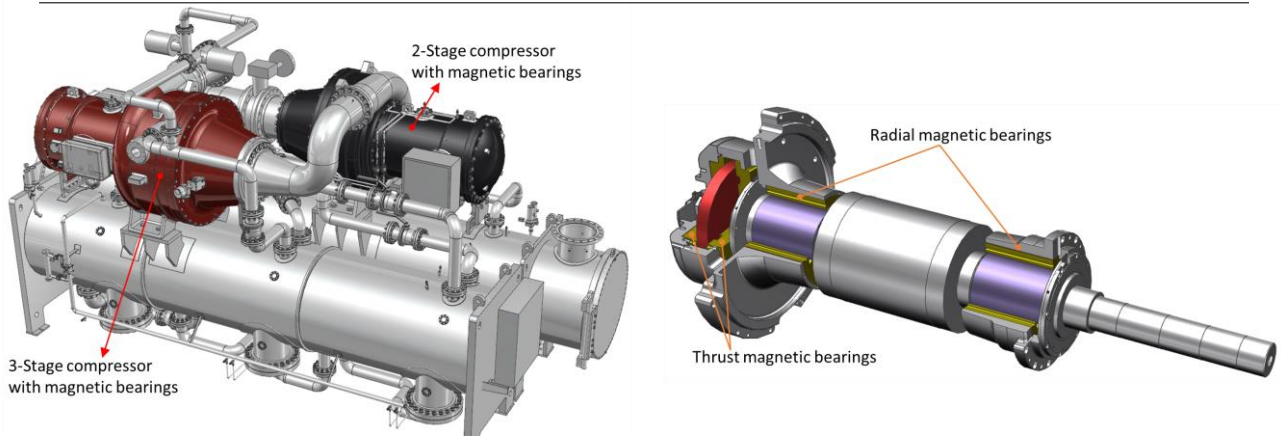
LG Electronics 3000 USRT oil-free turbo chiller with two compressors operated in series (left), and schematic view of rotor-bearing structure for 3-stage compressor (right)
